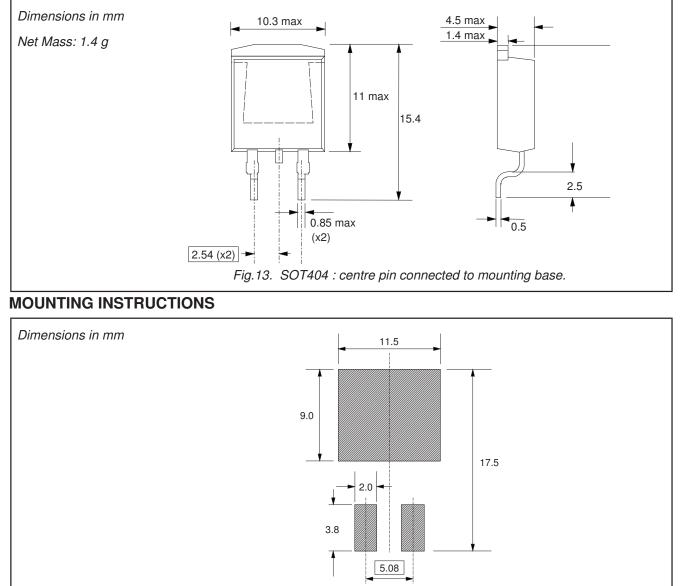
SOT404 : minimum pad sizes for surface mounting.
